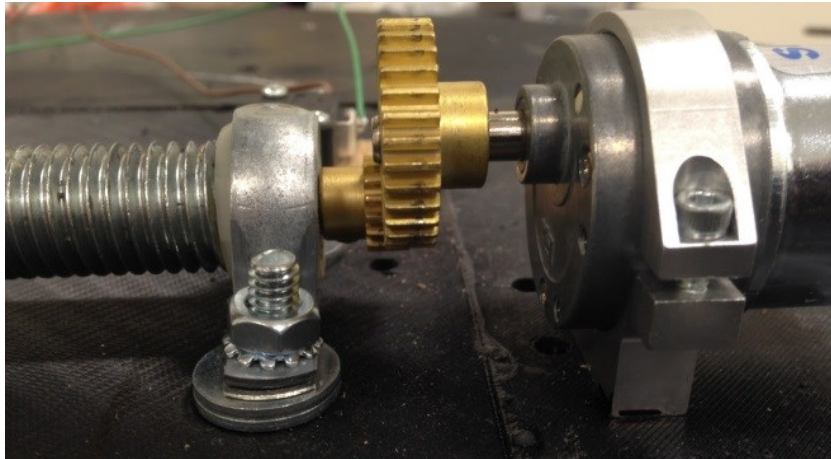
Picture showing the Lifting Mechanism's connection to a DC Motor
